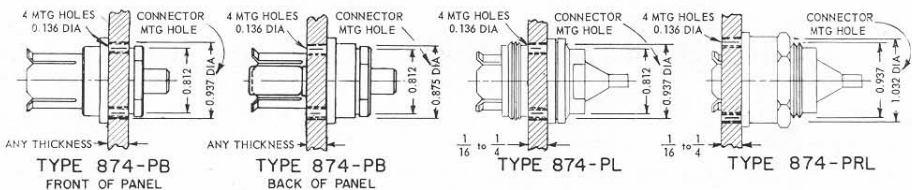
Mounting dimensions for Type 874 Panel Connectors.
